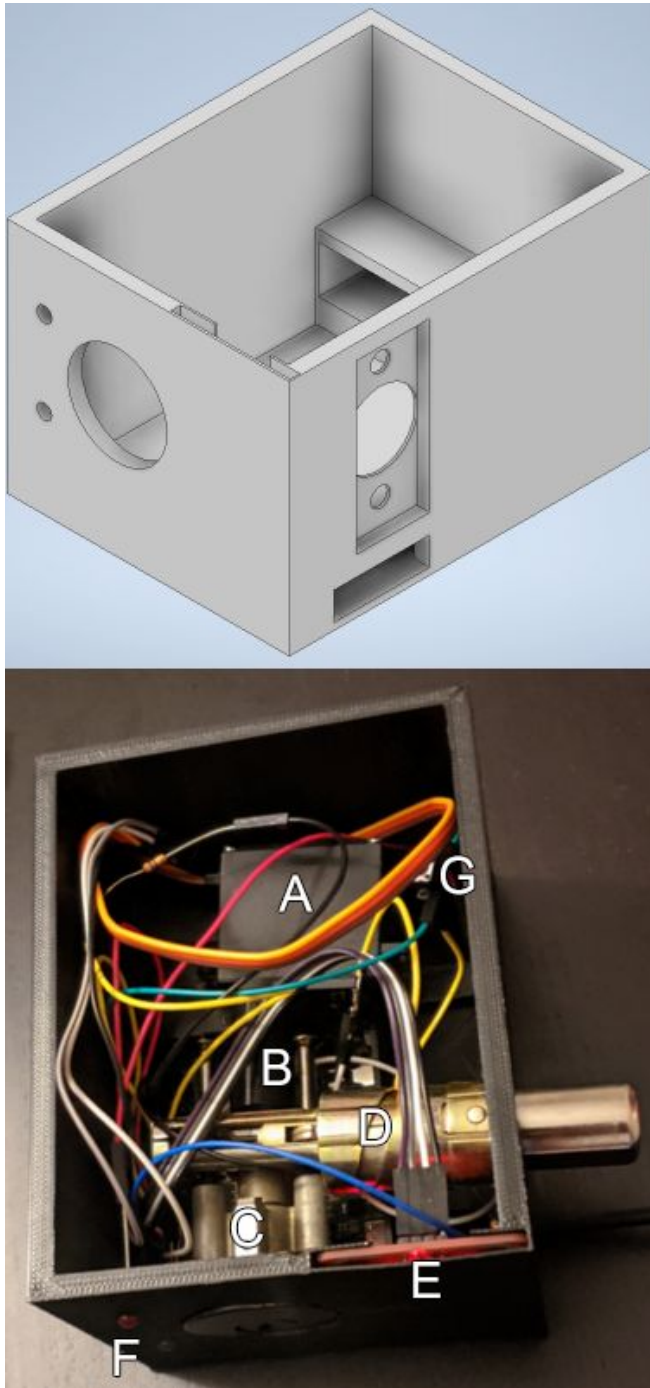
Top: CAD design of iDoorlock housing. Bottom: completed iDoorlock working prototype. A: MG995 servo motor. B: Lock cylinder tailpiece-servo motor connector. C: Lock cylinder. D: Deadbolt. E: NFC Shield module. F: Indicator LEDs. G: Manual lock button.
